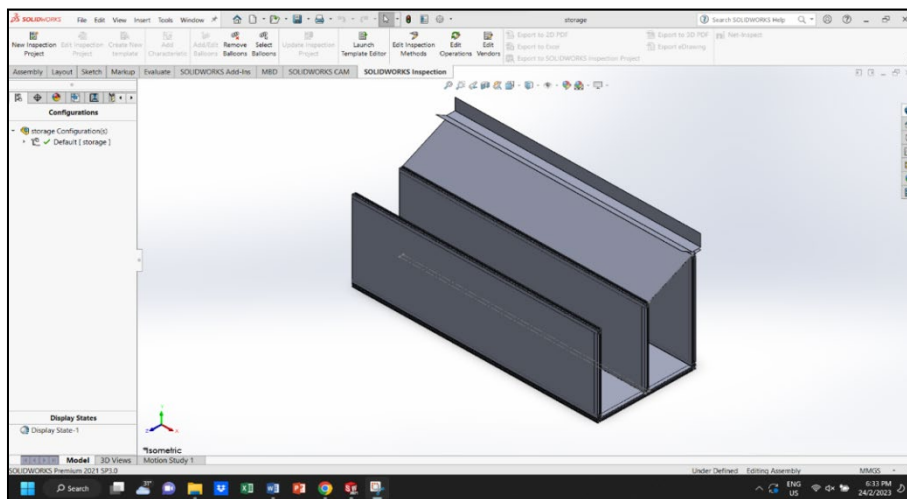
The early stage proposed design of Smart Extrusion Line translated into Solidwork format
